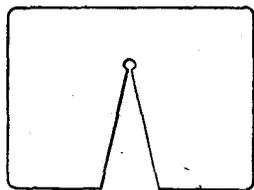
The usual form of angle gauge with clearance hole at corner.
